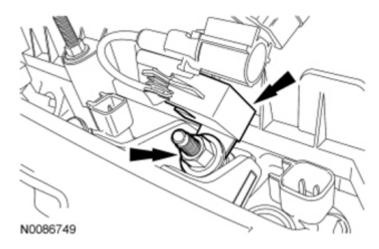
Locating Fuel Rail Insulator Courtesy of FORD MOTOR CO.
